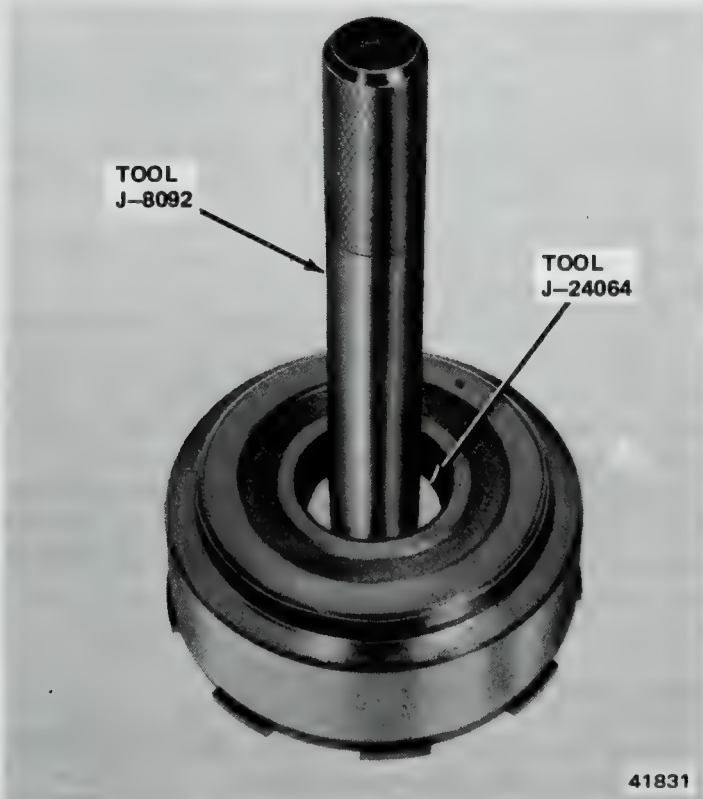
C-75 Clutch Retainer Bushing Removal—Models 904-998
